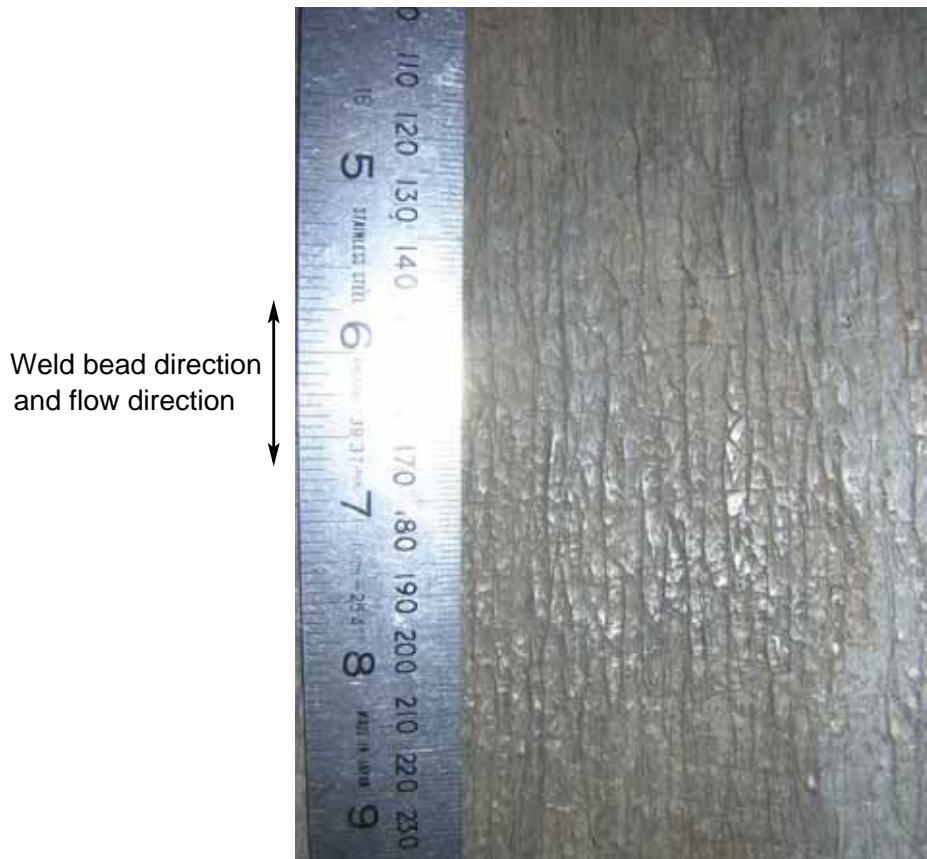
Wear surface of WeldoverlayB showing the check crack pattern.
